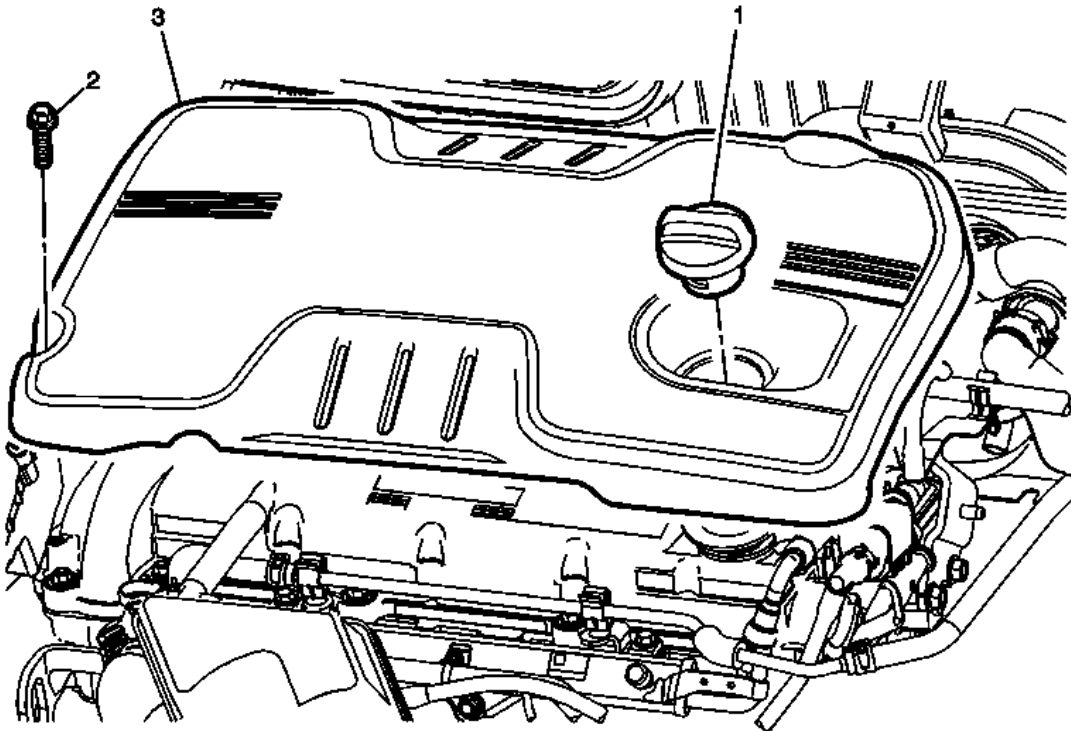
Intake Manifold Cover, Fastener & Oil Cap
